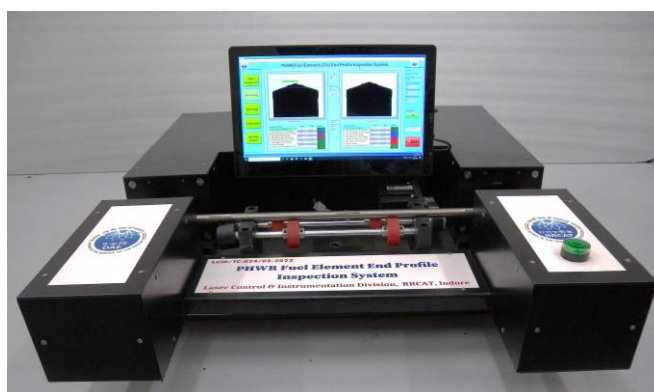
PHWR fuel element end profile inspection system.
